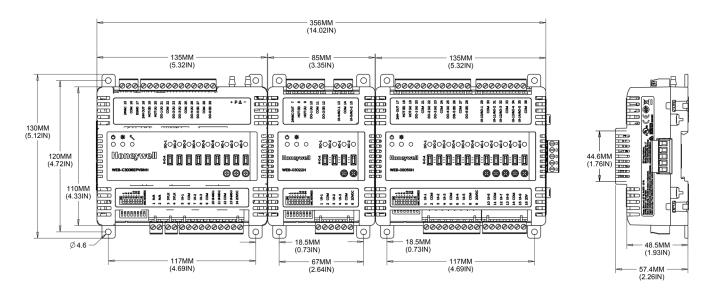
Dimensional view of Stacked Controller and Expansion IO modules
